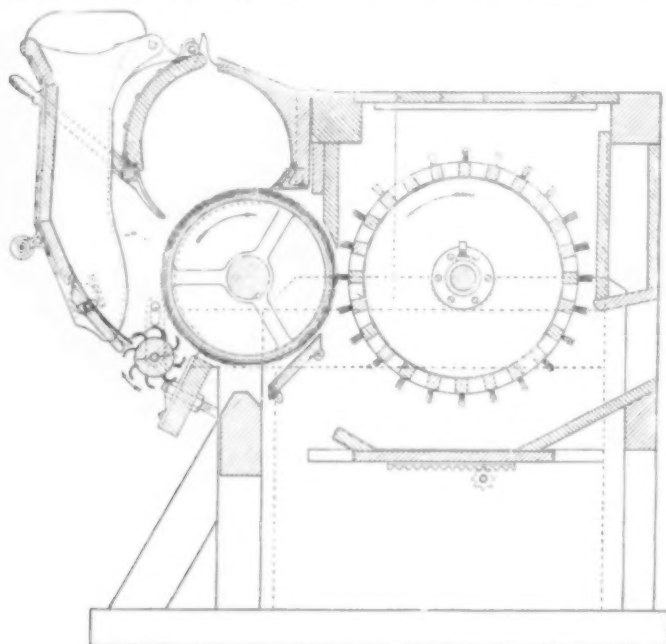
SECTION OF THE FULLER COMBING GIN.
